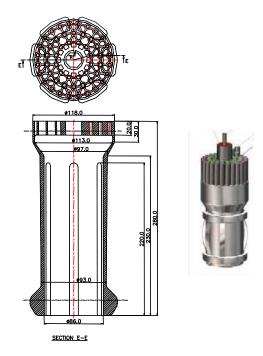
Bottom Tie Plate Assembly for 54-rod Cluster.
